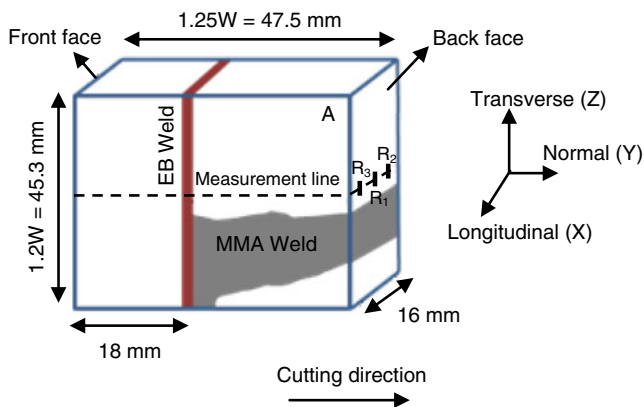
Schematic drawing showing the final dimensions of the Esshete CT blank after machining to size for neutron diffraction, slitting and contour residual stress measurements. The measurement line/plane and locations of back-face strain gauges applied for the slitting are also indicated
